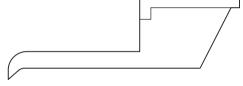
Rim Exit Device Strike (Source: Courtesy of SARGENT® Manufacturing Company)
